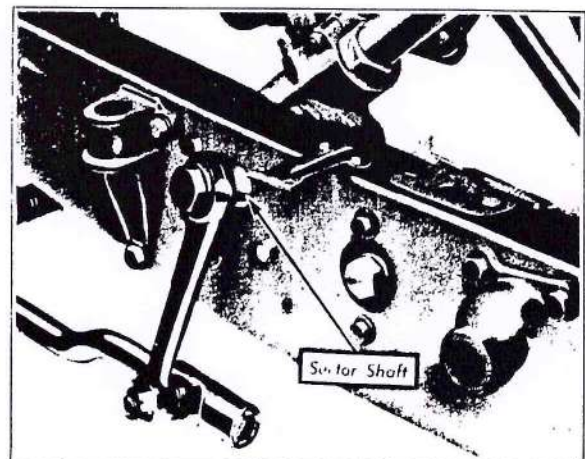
The 355 steering gear sector shaft is tipped upward at the outer end.
